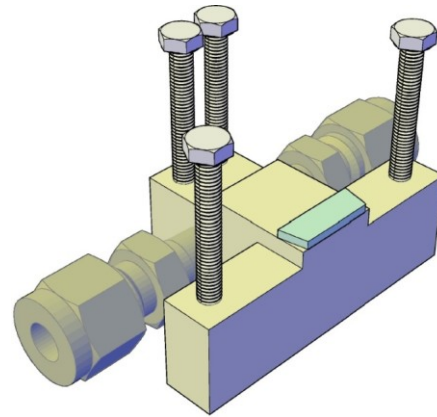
AutoCAD drawing showing the position of the crystal inside the holder.
